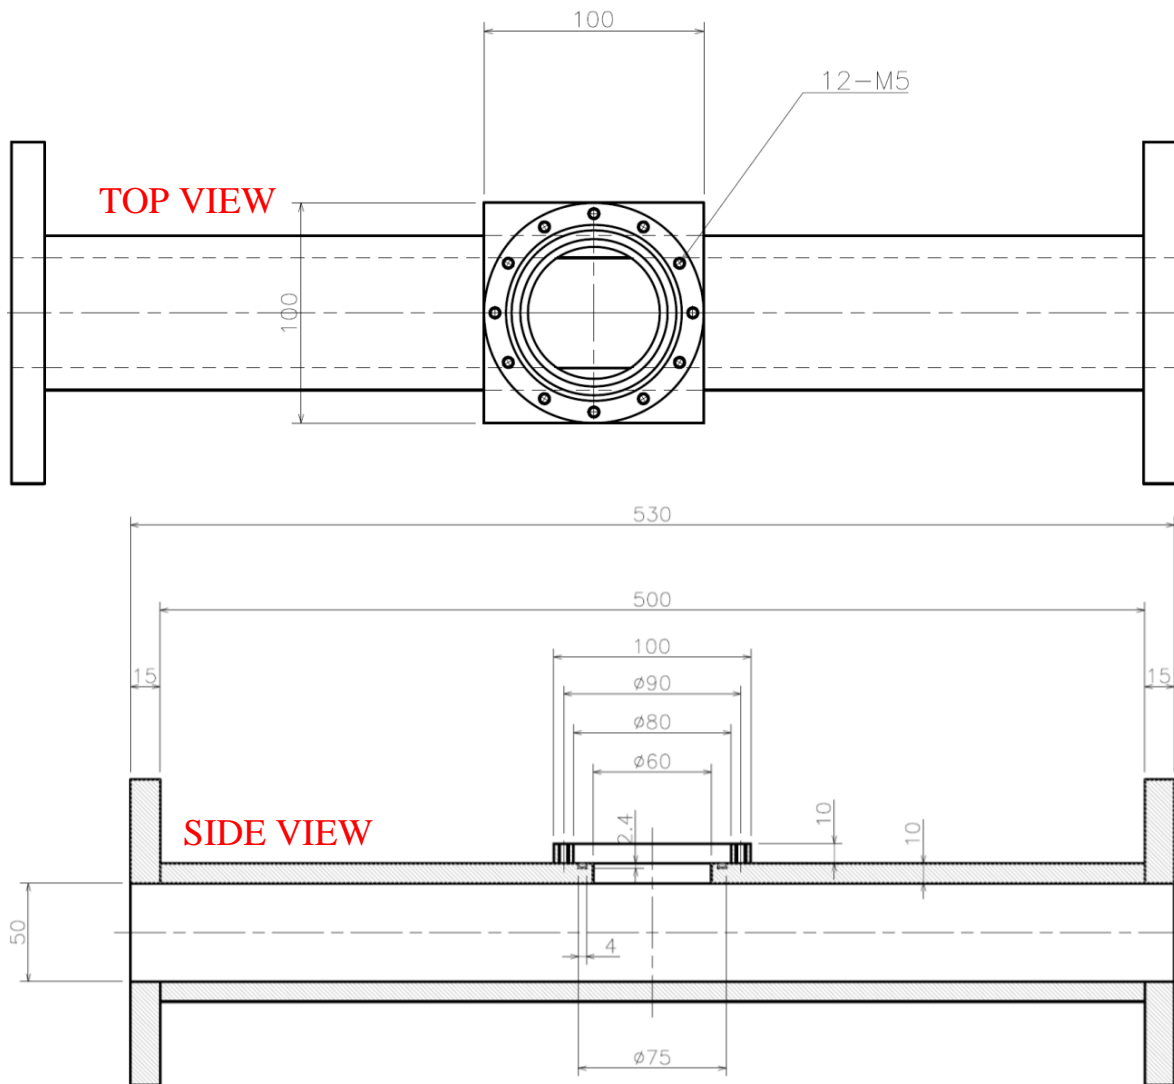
CAD drawing of shorter portion of channel (dimensions in mm).
